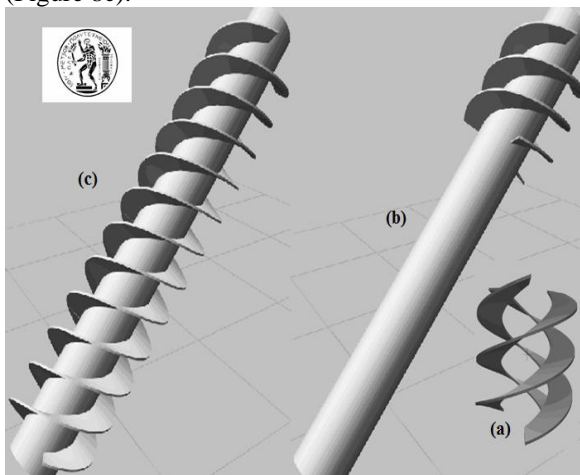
Placing screw blades on the inner screw cylinder (a, b, c)
